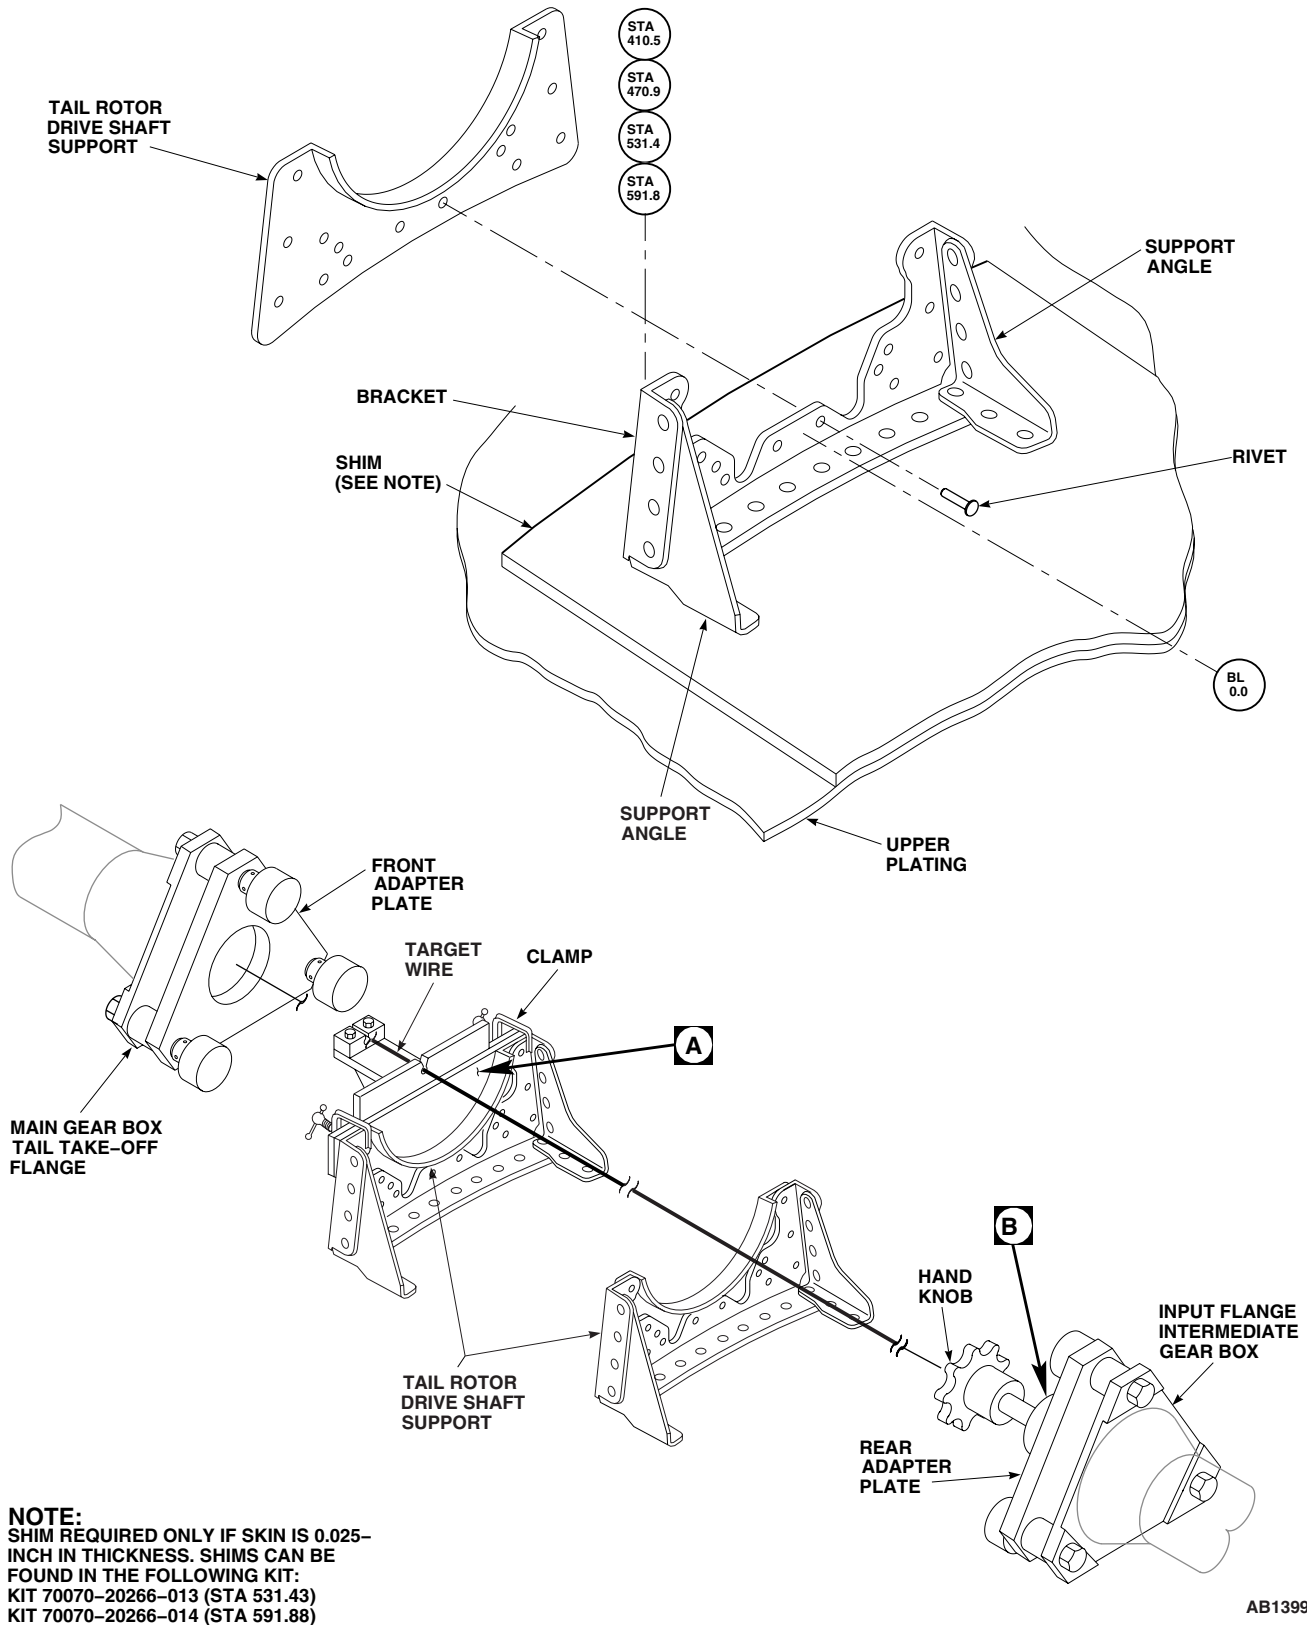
Tail Rotor Drive Shaft Supports (AVIM). (Sheet 1 of 2)
